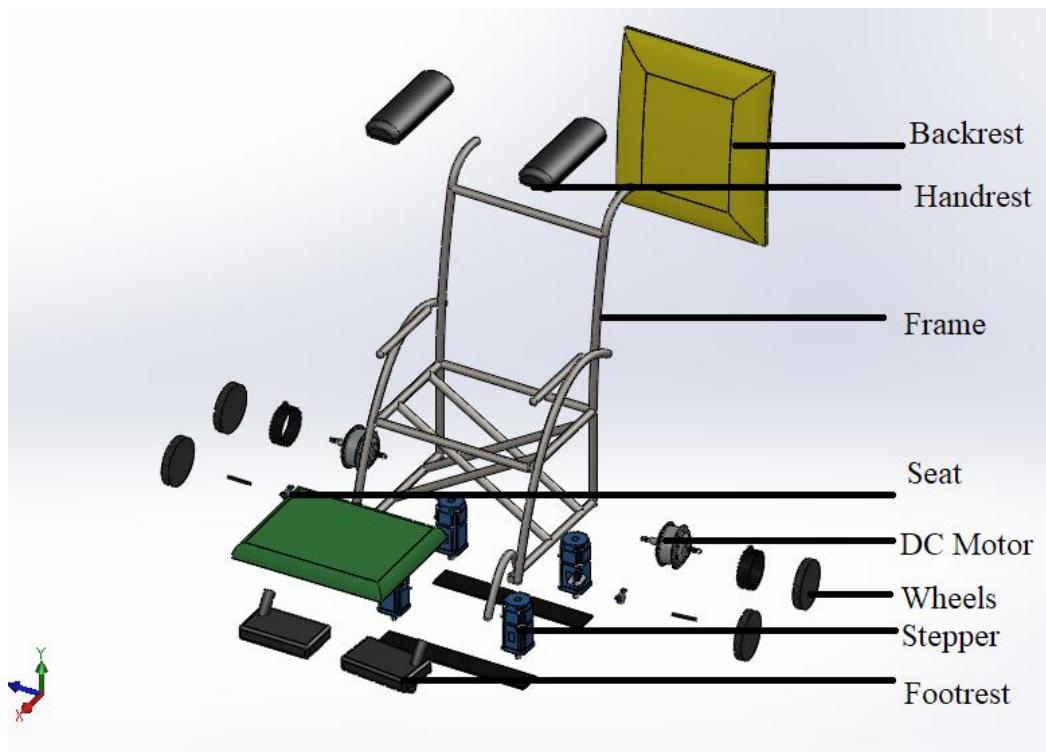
Exploded View of the Wheel Chair CAD Model
